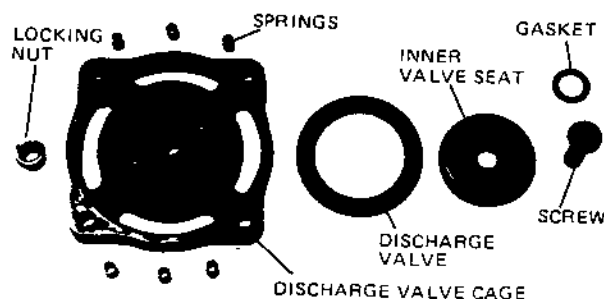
B — ORIGINAL DISCHARGE VALVE CAGE ASSEMBLY
